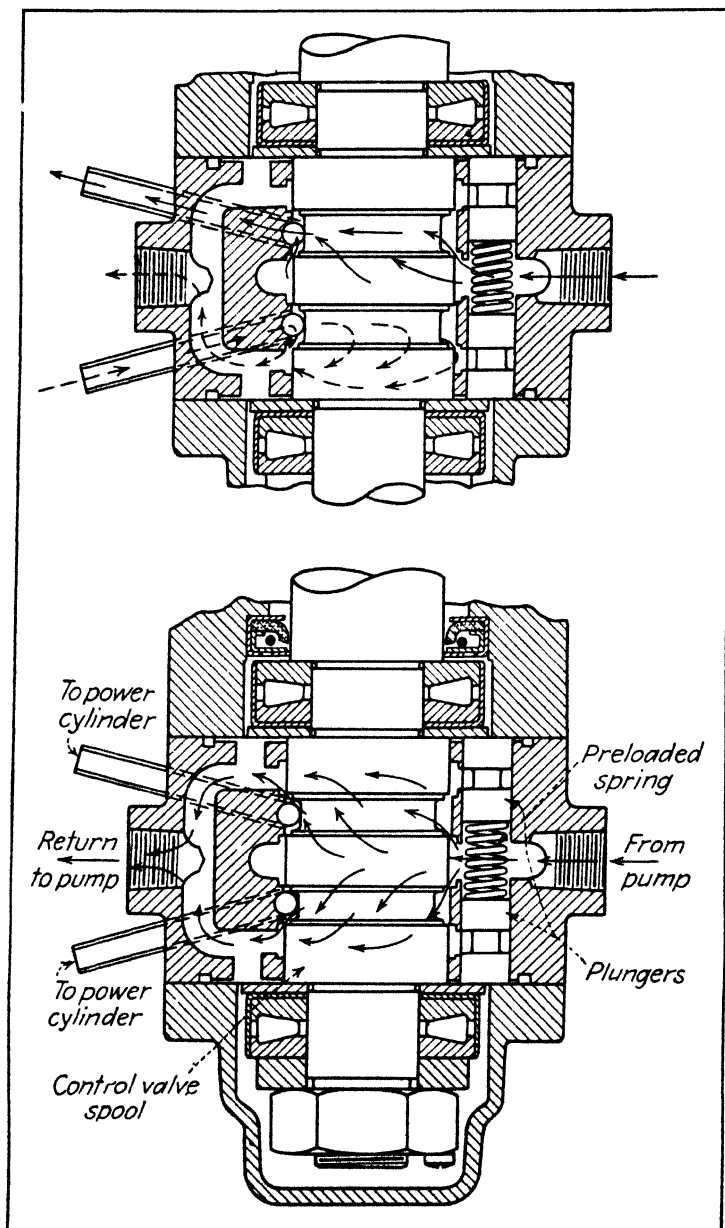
CONTROL VALVE OF HYDRAULIC STEERING UNIT.
